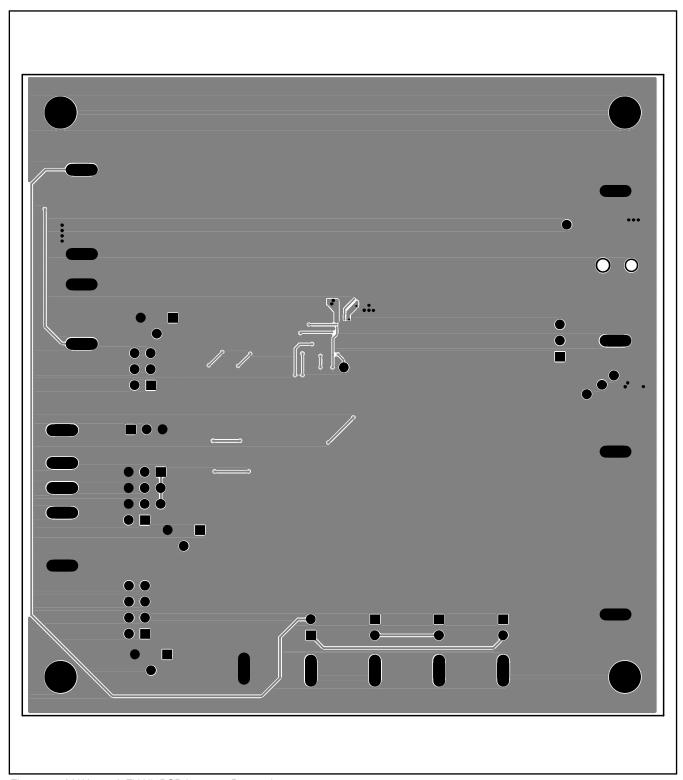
MAX8900A EV Kit PCB Layout—Bottom Layer
